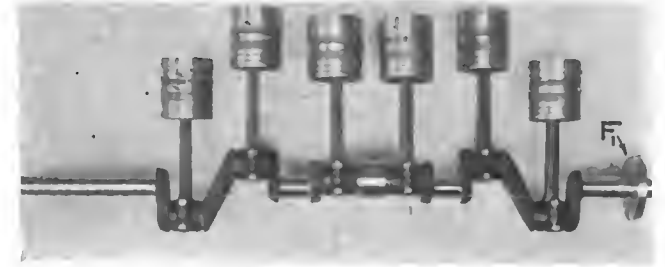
Crankshaft assembly, depicting flange at rear, flywheel bearing in front, and lightness of reciprocating parts
